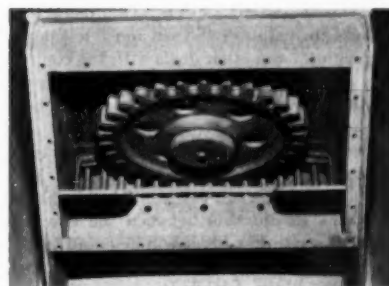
VIEW OF PINION-AND-PIN RACK ENGAGEMENT
